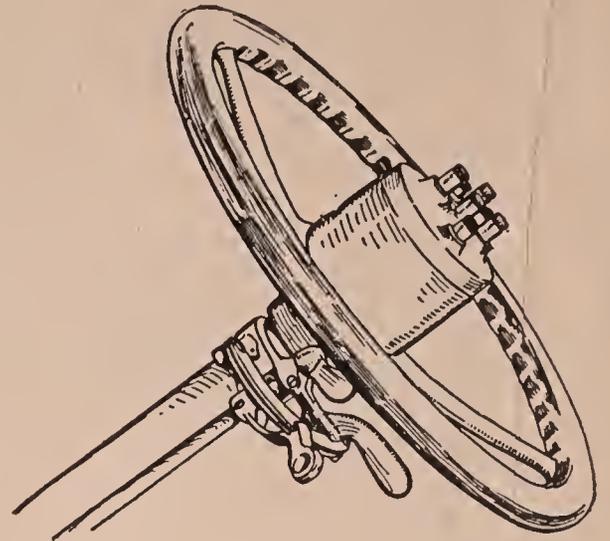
The Steering Wheel of the Haynes Car Which Uses the Electric Gearshift, Indicating How the Push Buttons Are Arranged.
